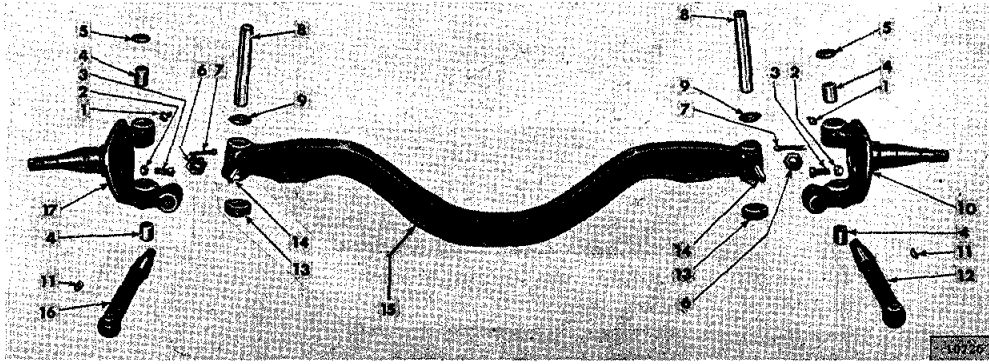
FRONT AXLE (DJ5) (CJ6)
